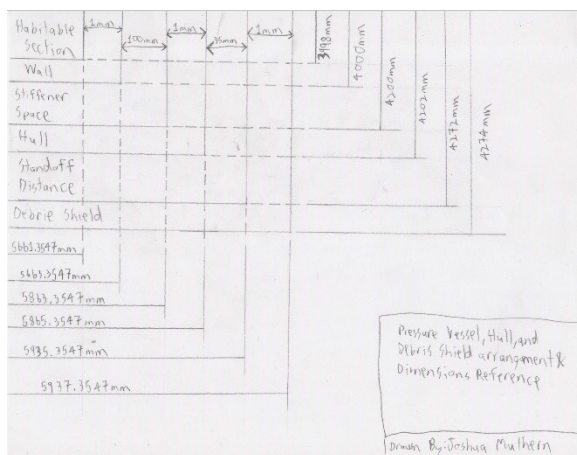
Hand Drawing Pressure vessel, hull, debris shield arrangement and dimension reference
